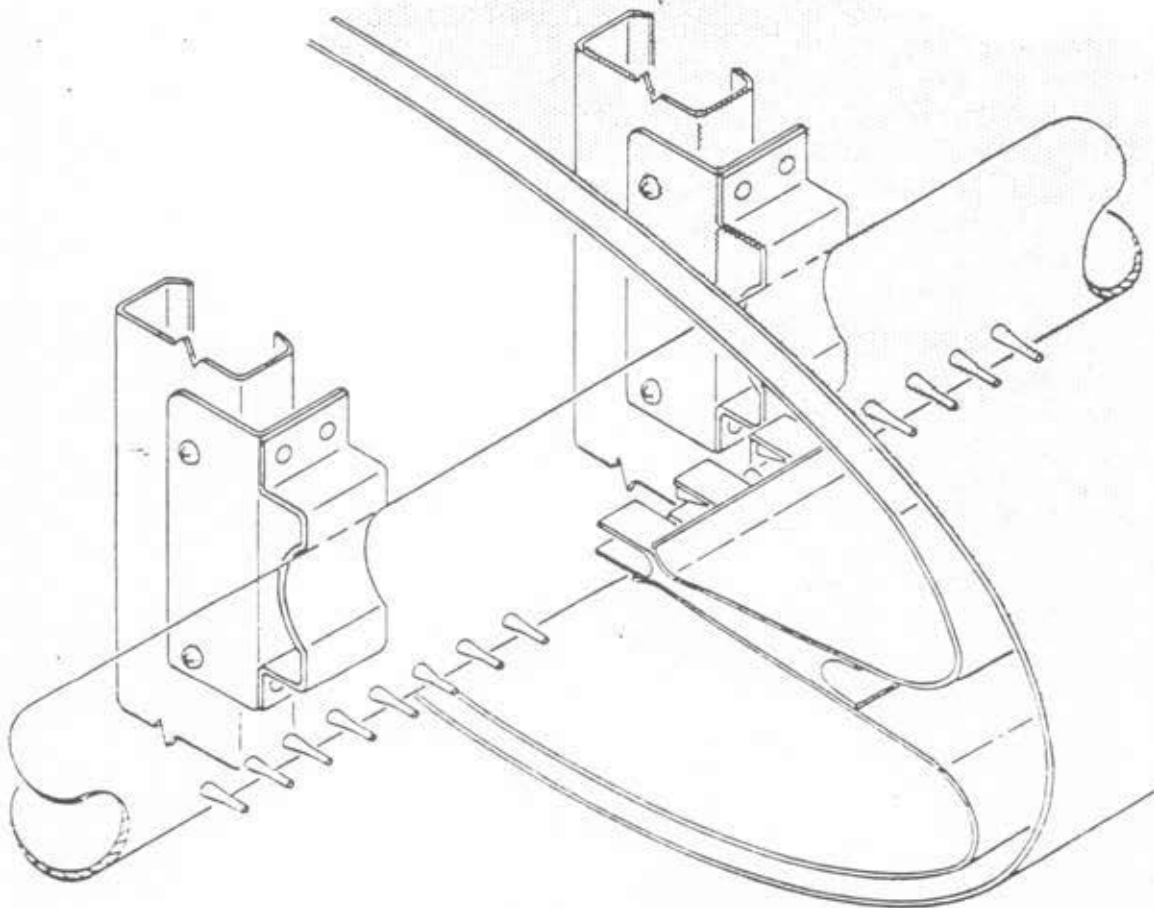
ANTI-ICING PICCOLO TUBE - WING
